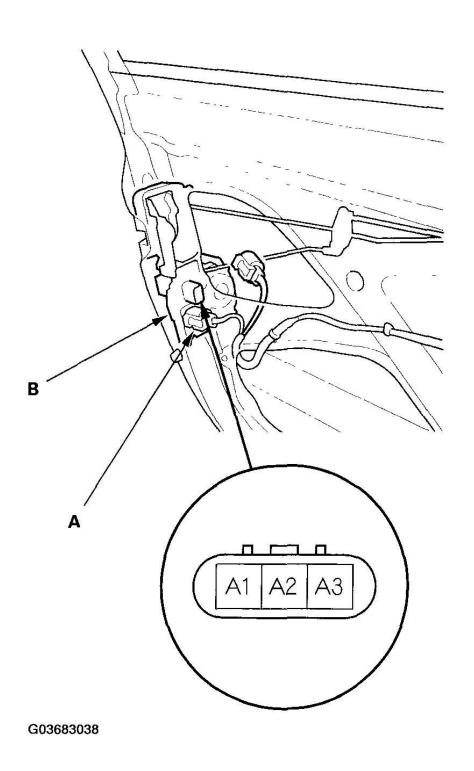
Disconnecting 3P Connector From Actuator Courtesy of AMERICAN HONDA MOTOR CO., INC.
